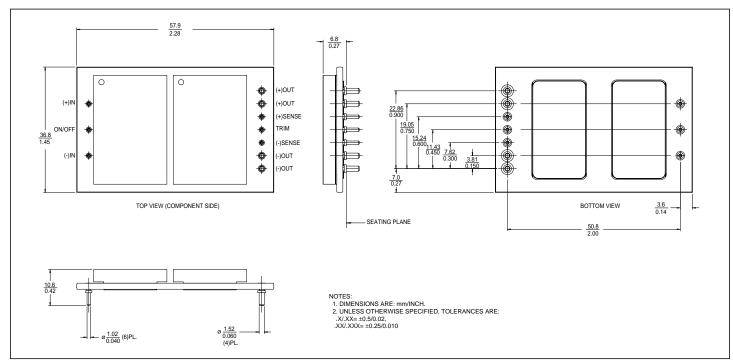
Mechanical outline and PCB footprint information; dual output pin version (package style 2)
